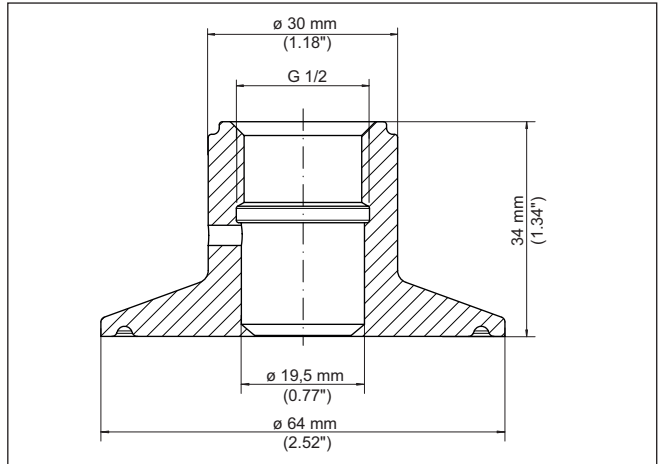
Dimensions hygienic adapter G $\frac{1}{2}$ (DIN 3852-X) on Clamp 2" (DIN 32676, ISO 2852) PN 40 - Cone seal
